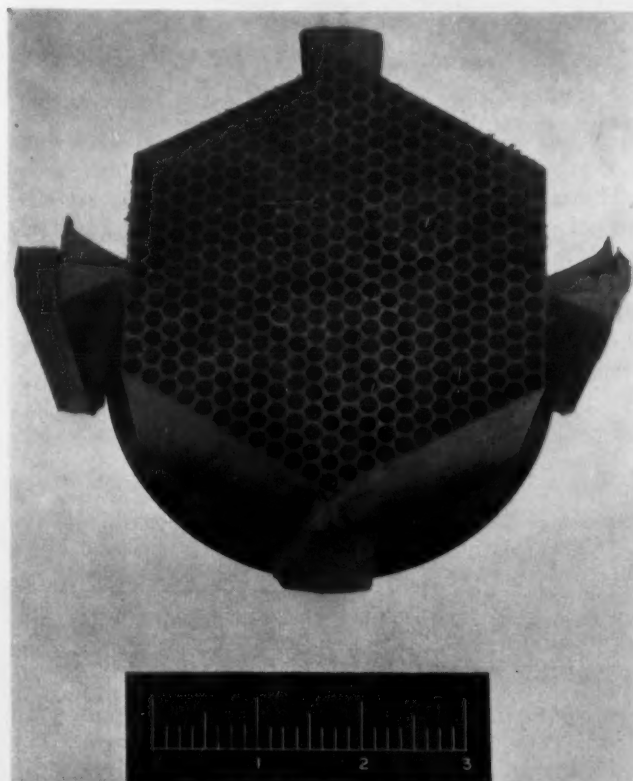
Typical 2-in. high casting after mold and cores were removed.
